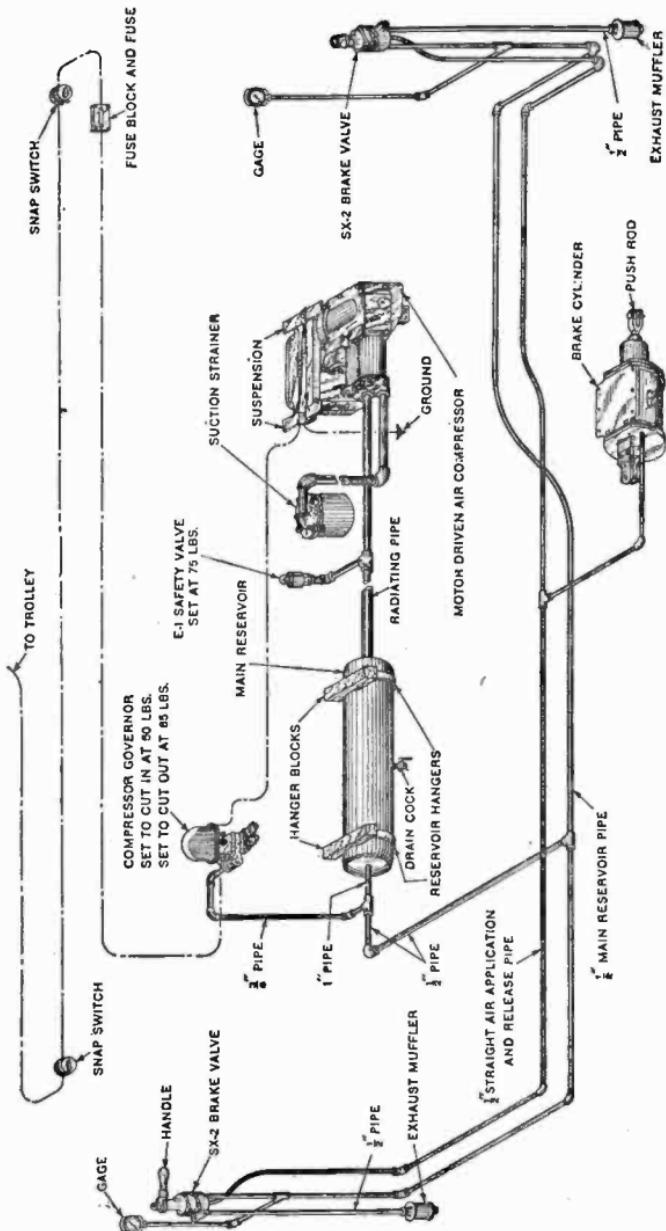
,301.—Westinghouse straight air brake equipment; pictorial view showing parts and pipe connections.
